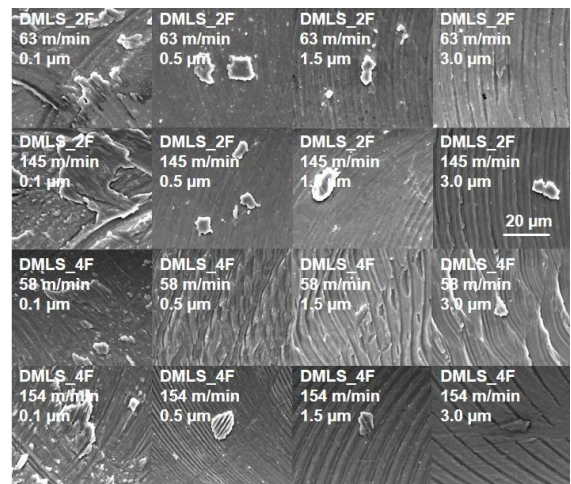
Surface defects at the slot bottom (2F: two-fluted tool; 4F: four-fluted tool, cutting speed, feed per tooth)
